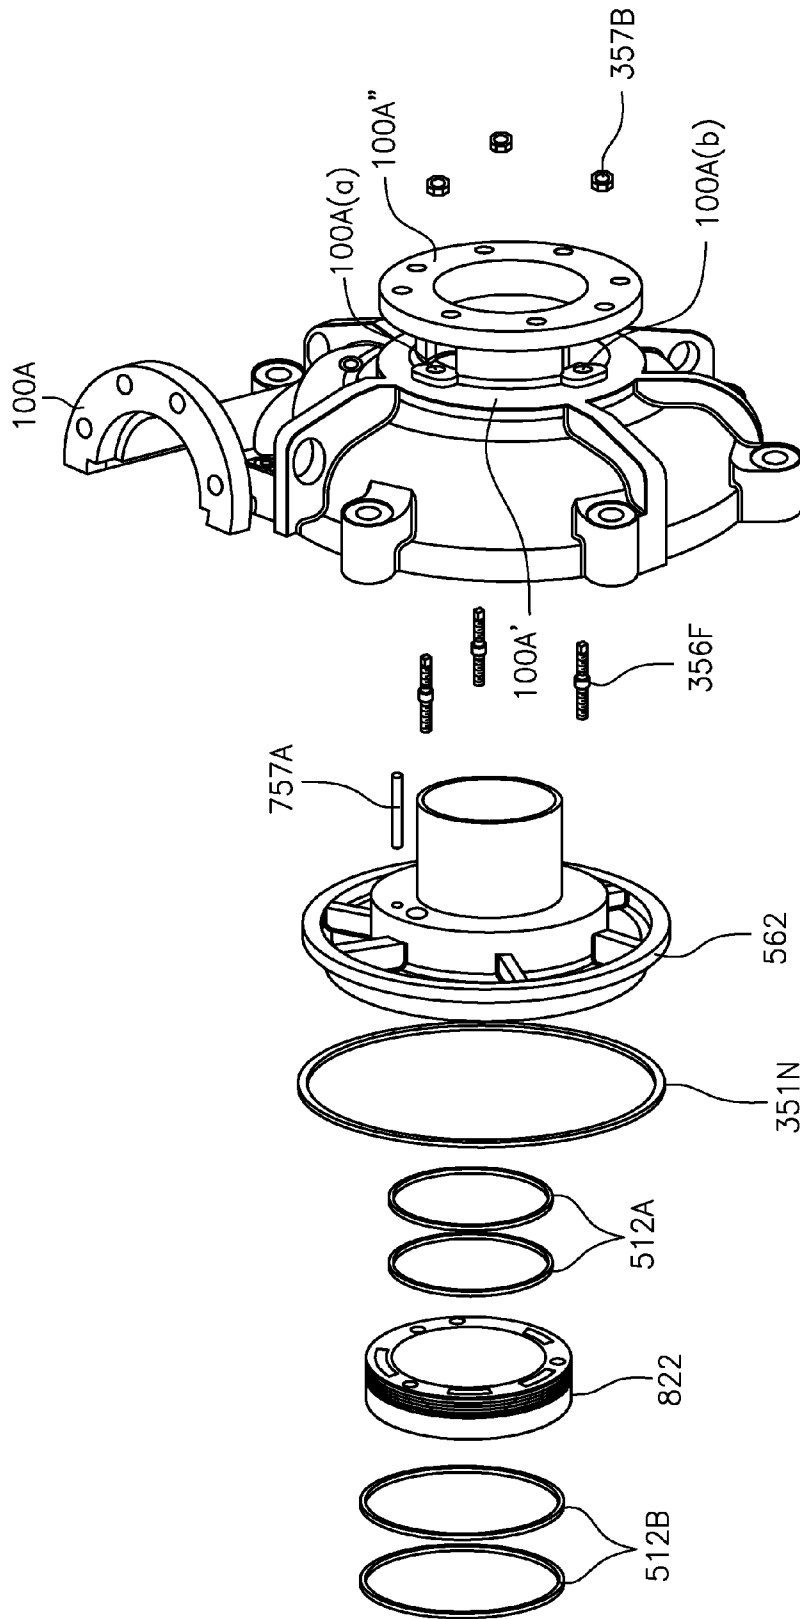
Portion of Liquid End Assembly Showing Parts of Interest
